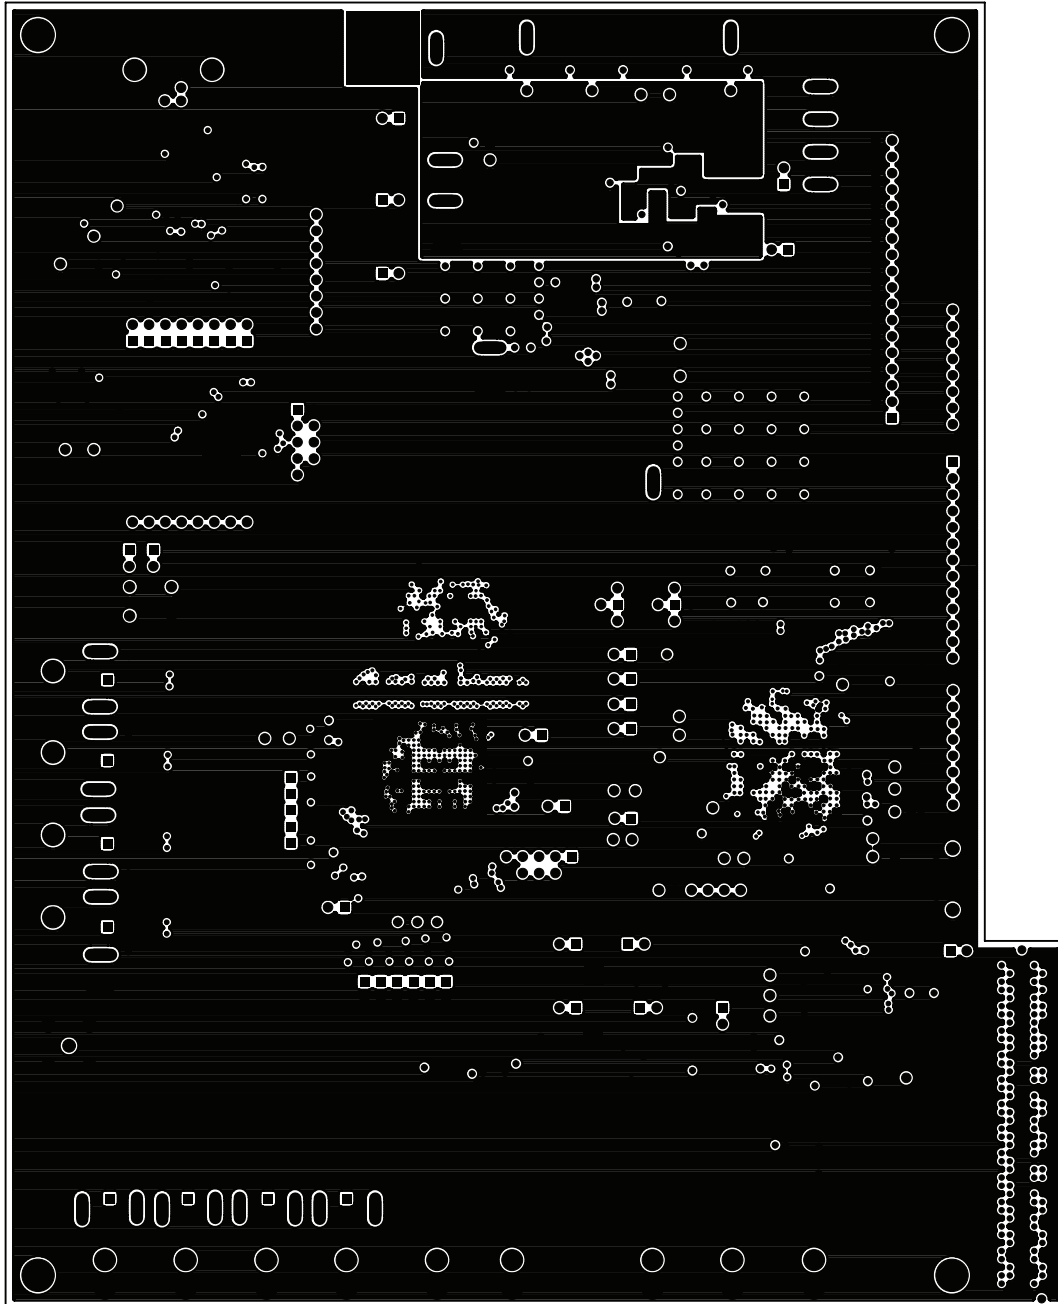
MAX9530 EV Kit PCB Layout—Ground Layer 2
